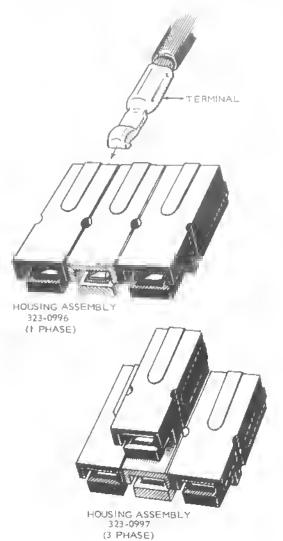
SINGLE AND THREE PHASE PLUGS
